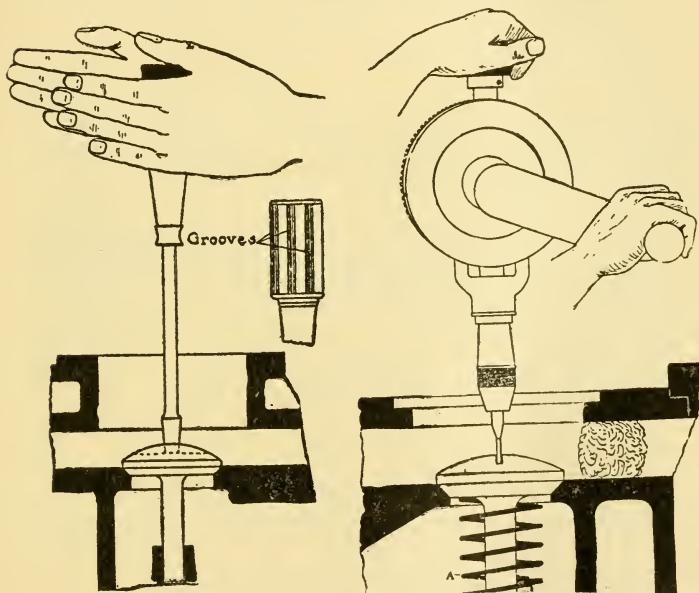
Method of using a screw driver for valve grinding. A handful of waste or a cloth is put in the valve port to protect the cylinder, and the valve face coated with a paste of fine emery powder and oil and put in place. The handle of the screw driver is now held between the palms of the hands as in the sketch, and a series of oscillations through a small arc given to the valve by moving the palms in opposite directions. After about thirty of these oscillations have been given, the valve is lifted from its seat, given a half turn, and reseated for further grinding in the same manner. This operation should be continued with occasional additions of oil and emery, until the valve face and the seat appear to be bright for their full width around the circle.
